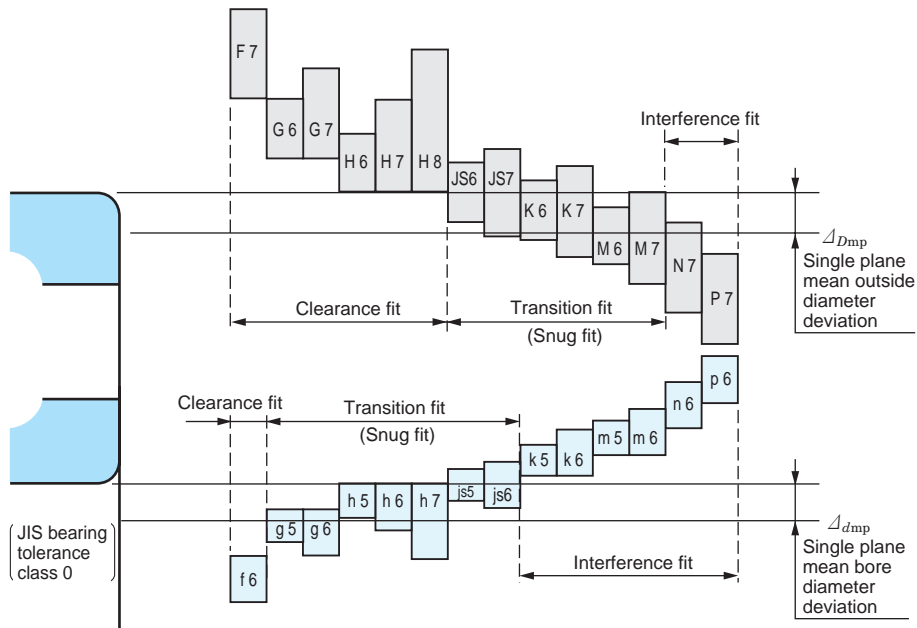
Relationship between tolerances for shaft/housing bore diameters and fits (bearings of class 0 tolerance)
